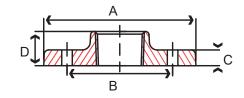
HF1 - 125 lb. Threaded Hydrant Flange
